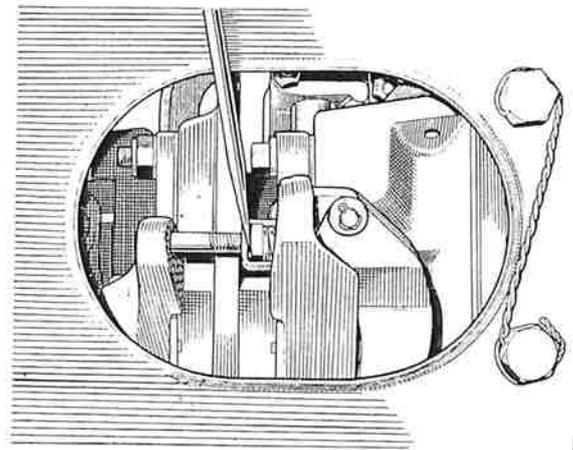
Preloading the handbrake caliper return spring with a screwdriver
